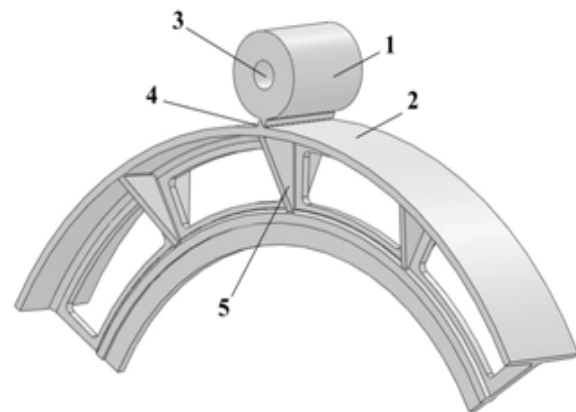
Geometrical model of gearing: 1 – pinion; 2 – ring gear; 3 – landing surface of pinion; 4 – gear tooth; 5 – gusset
